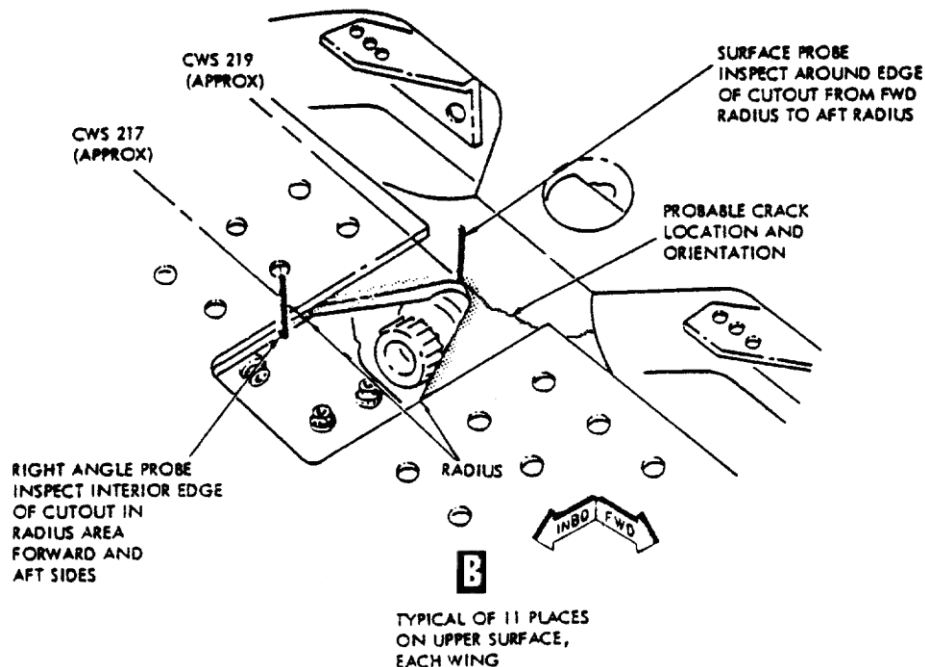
Upper Surface Wing Joint (Rainbow) Fitting, Attachment Bolt Access Cutouts (Sheet 2)
